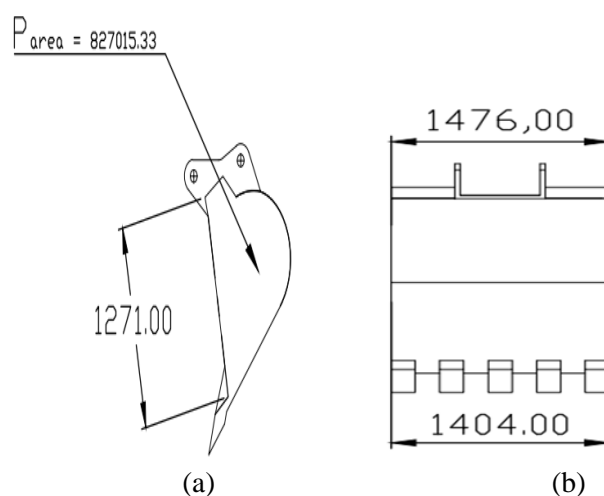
The different views of bucket, (a) side view, (b) top view
